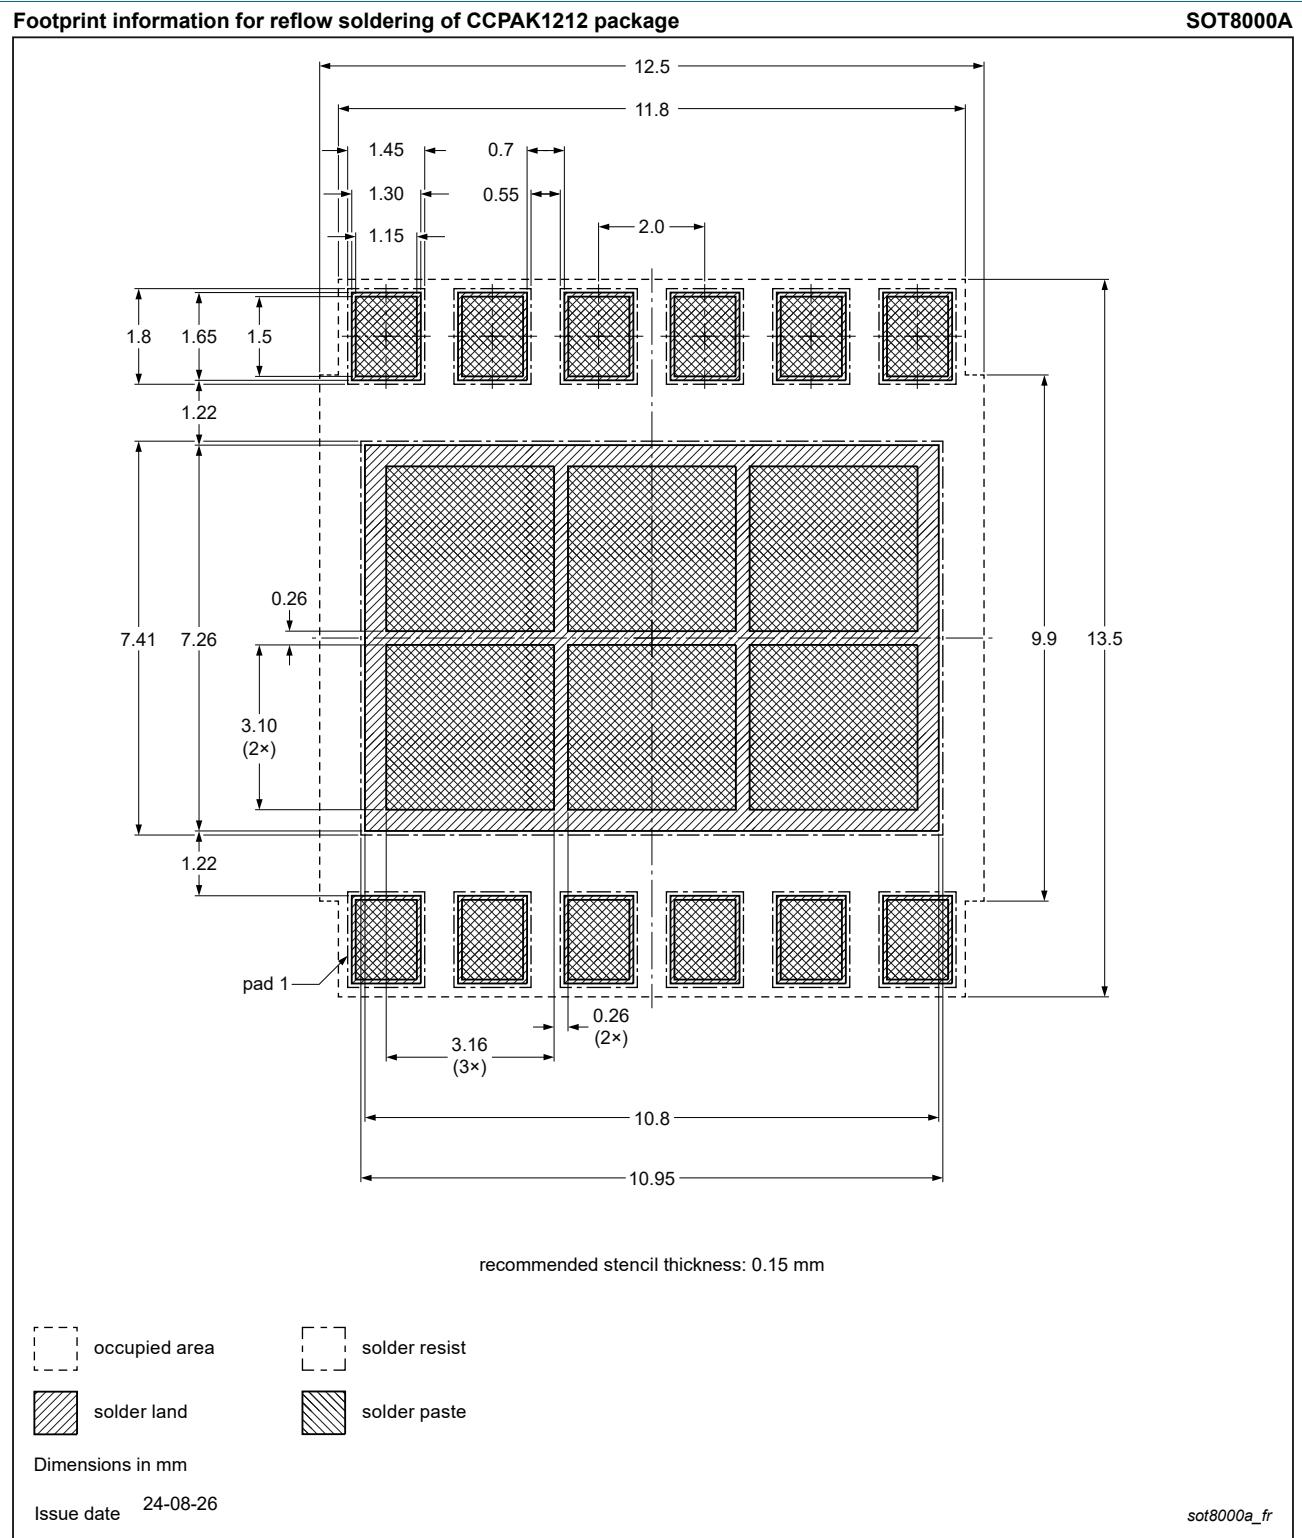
Reflow soldering footprint for CCPAK1212 (SOT8000A)
